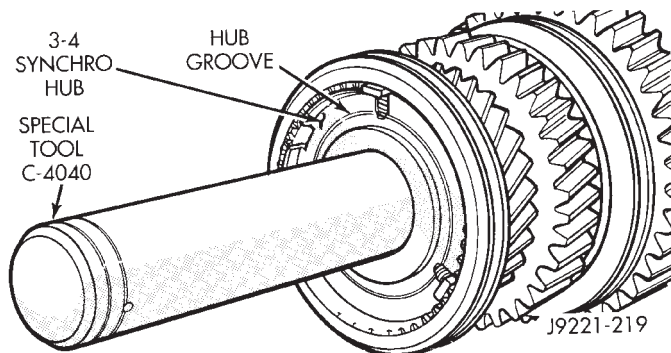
Seating 3-4 Synchro Assembly On Mainshaft
